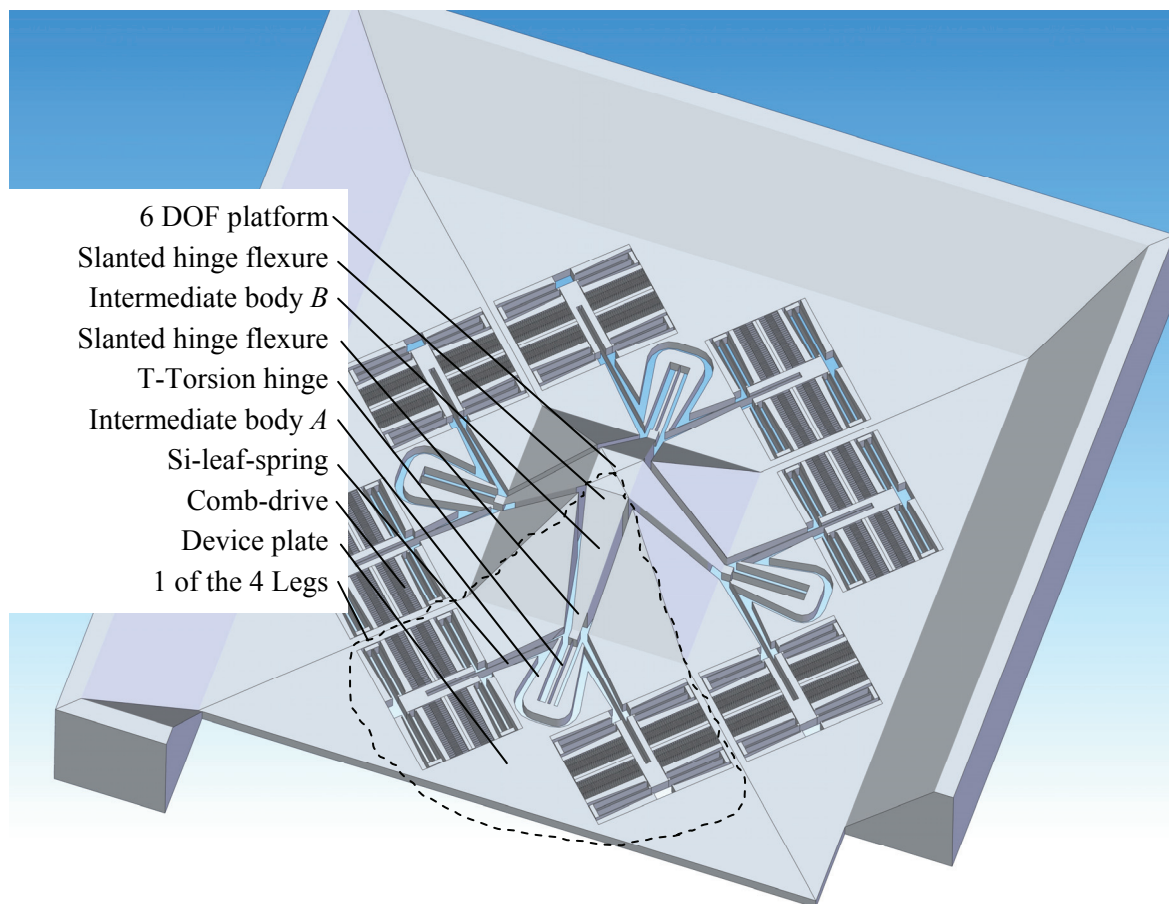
Top view of the slanted hinge flexure concept. For viewing purposes part of the side has been removed.
